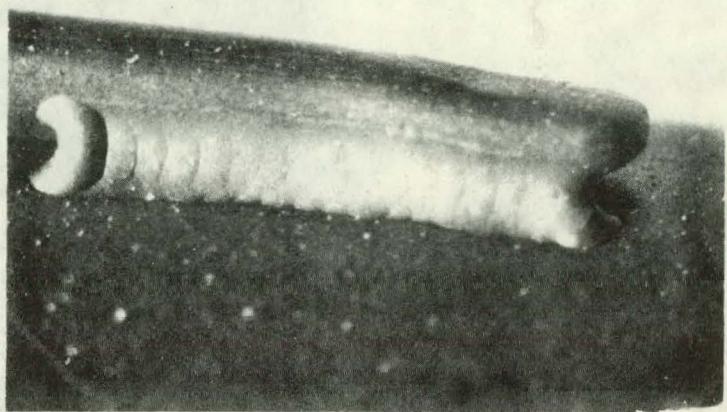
Thermocouple spade attachment weld after the three blowdown tests.
